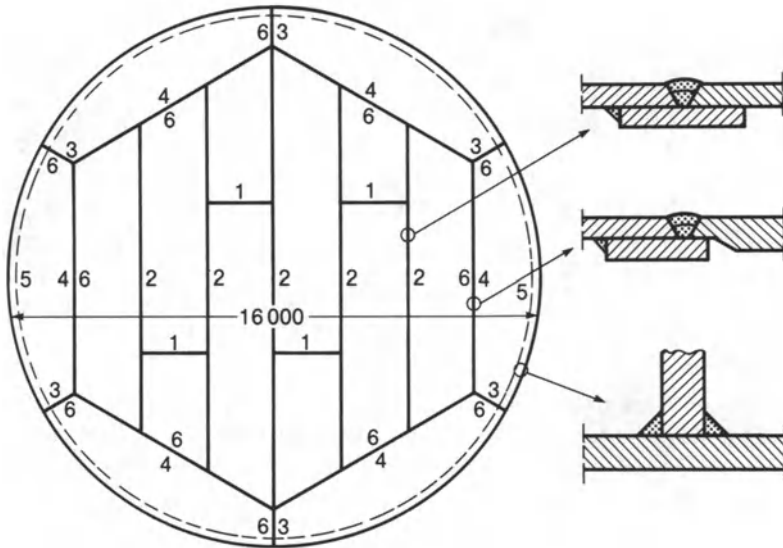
Joint design and welding sequence for plate panel of tank bottom; after Malisius [5]
